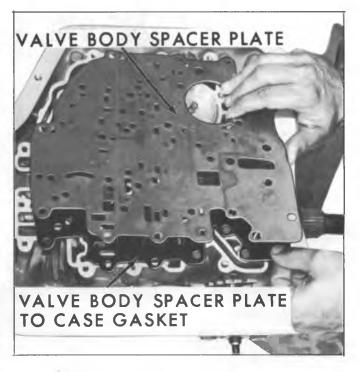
M--Removing Valve Body Transfer (Spacer) Plate and Gasket
